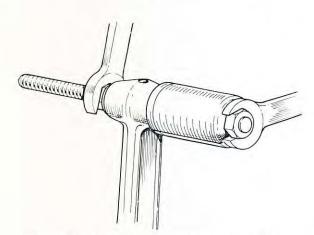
Using Service-tool No. 61–3653 to remove small end bush (B50 only).
